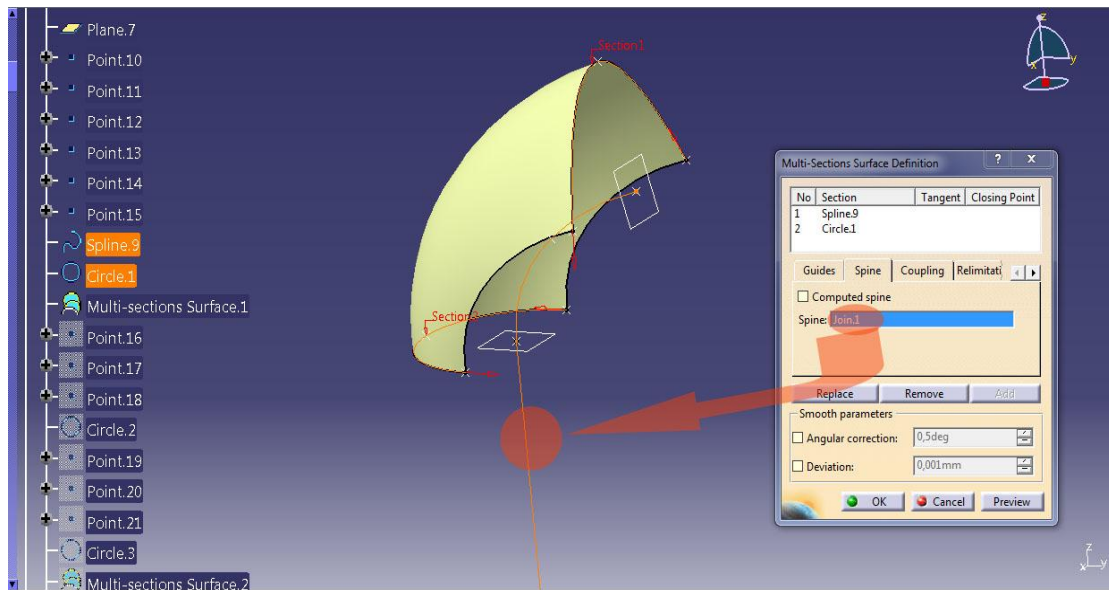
Plane definition normal to the steering wheel handle's spine.
